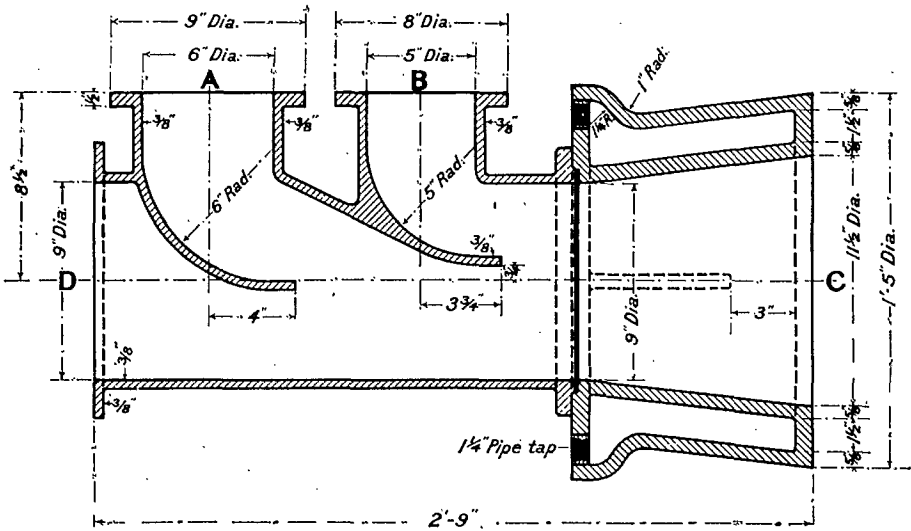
Longitudinal section of 5" Standard water cooled burner. Holbeck system, Bonnot Company.
